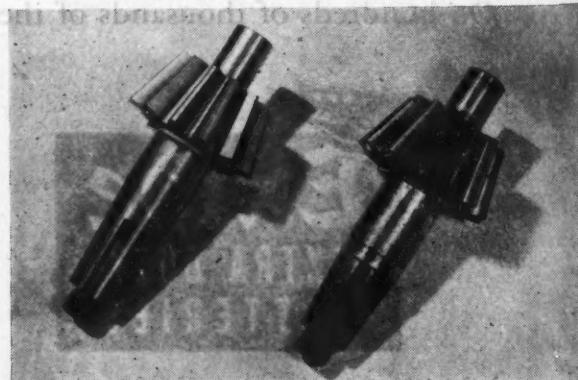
Before (right) and after (left) the axle pinion drive was renewed with weld and machined to size
